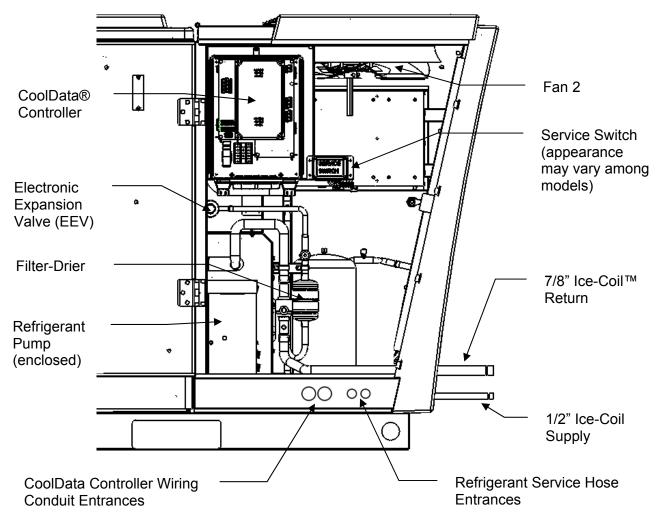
Ice Bear[®] Unit Internal Components (Left Side)
